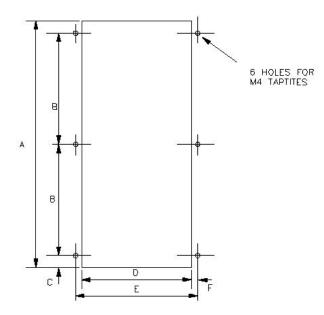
Fixing Centres on DELTA Cooling System for Ducting the Outlet
